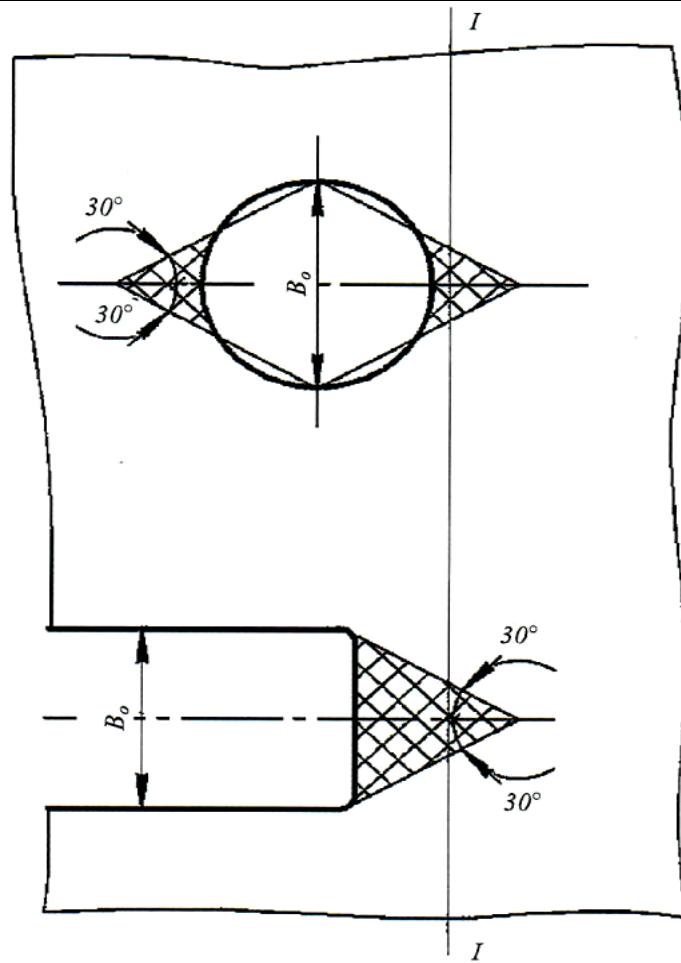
Deck areas (hatched) not considered in the design cross-section ($I - I$) when determine hull girder elements
